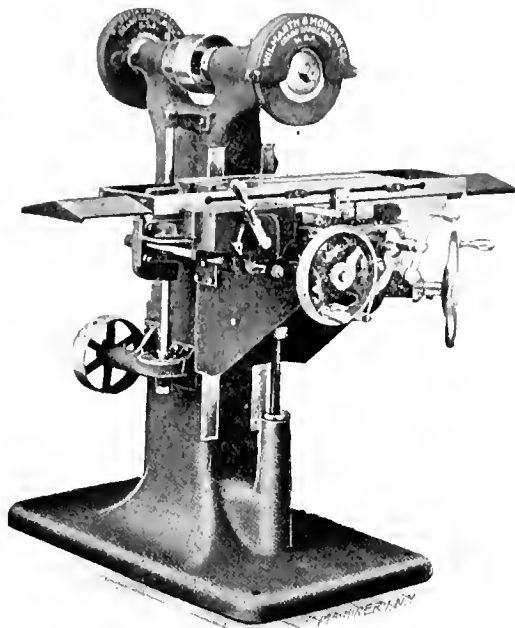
Front View of the Wilmarth & Morman No. 2 Surface Grinder.
